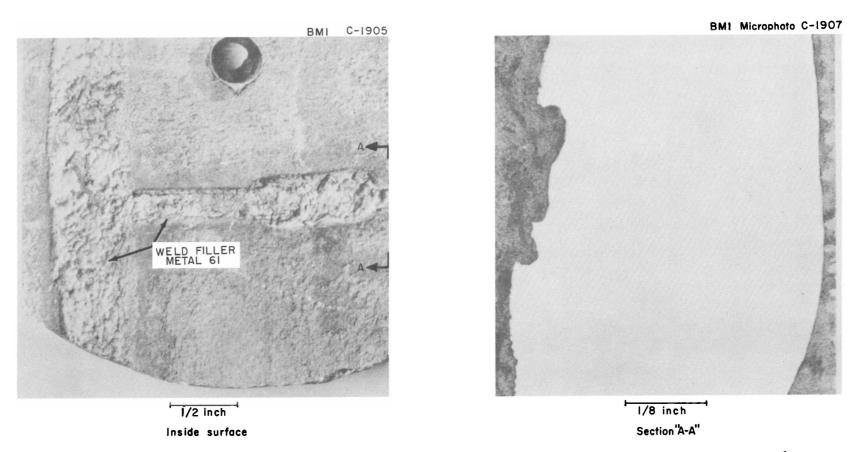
Section of the Fluorinator Wall Showing Corrosion of the Weld Filler Metal 61 After Twenty-nine Runs and 3 Aqueous Cleanings.
